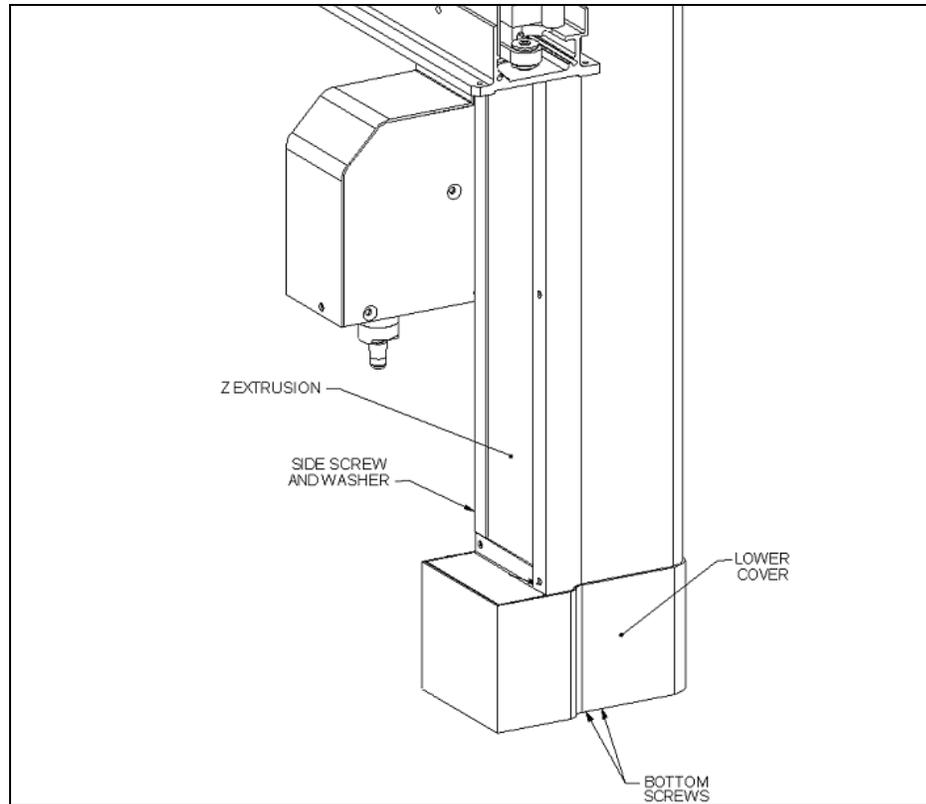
Z-Axis Drive Assembly: Bottom Cover
